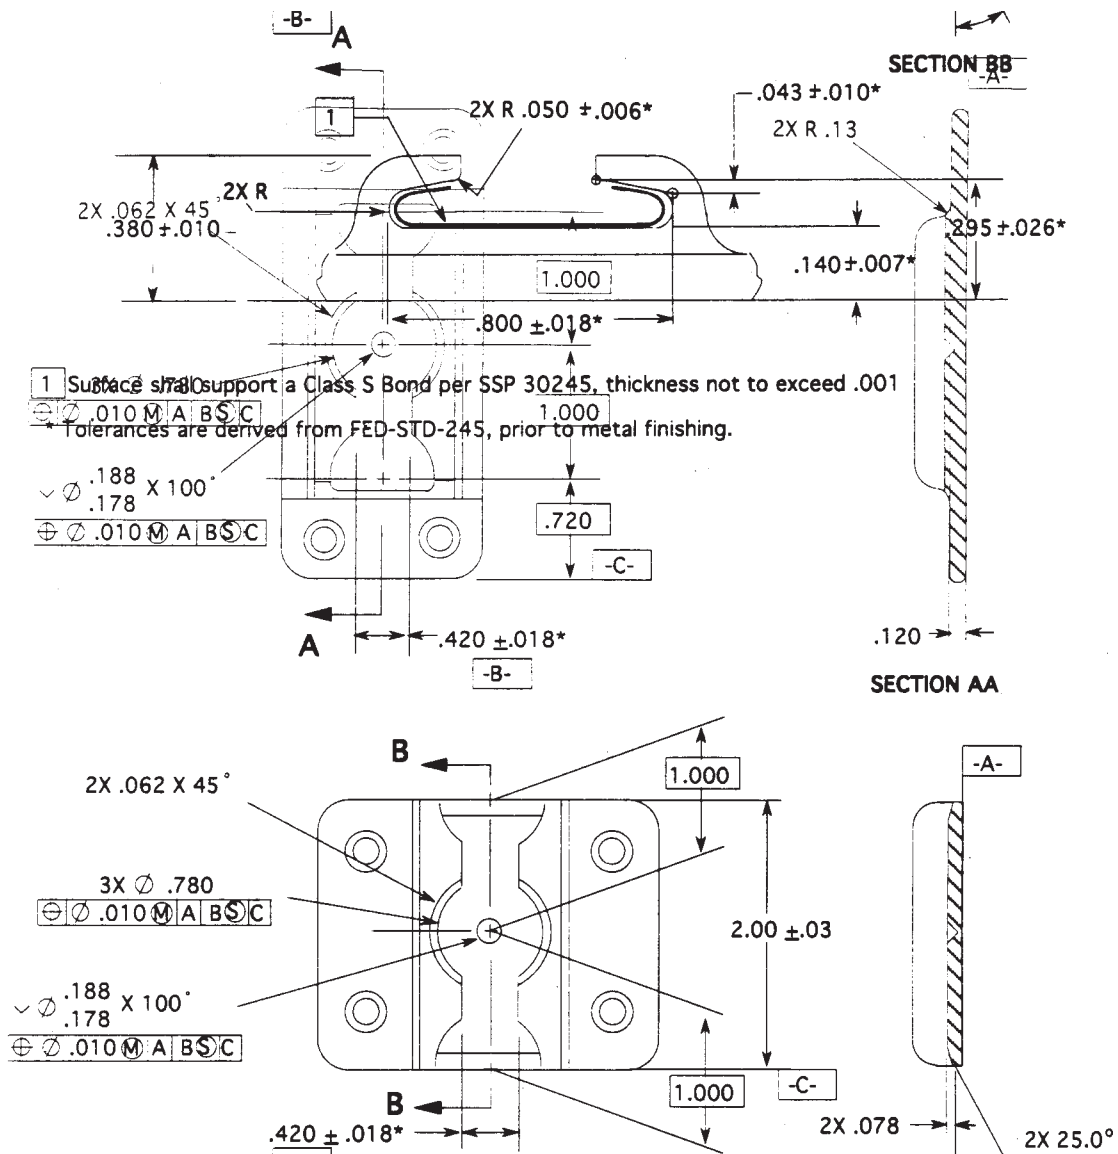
ON-ORBIT INSTALLED HANDRAIL BRACKET (SEAT TRACK) INTERFACE
